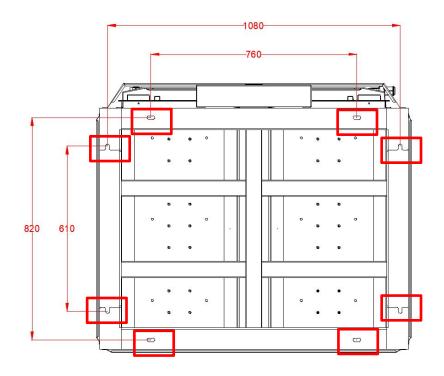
Layout of expansion bolts at the bottom of the rack
